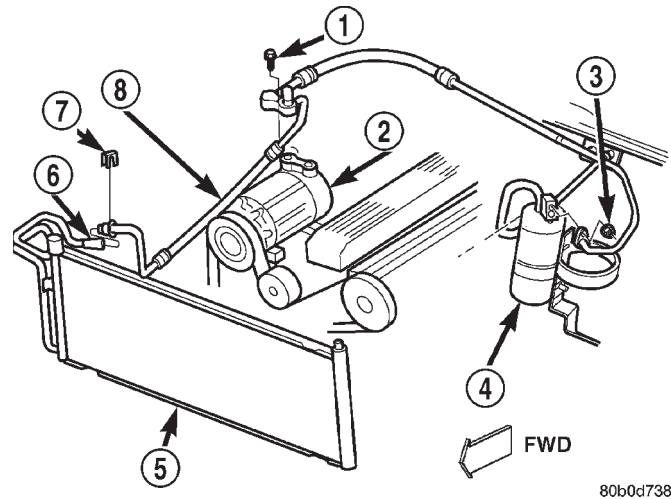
Suction and Discharge Line Remove/Install - Right-Hand Drive 2.5L Engine
